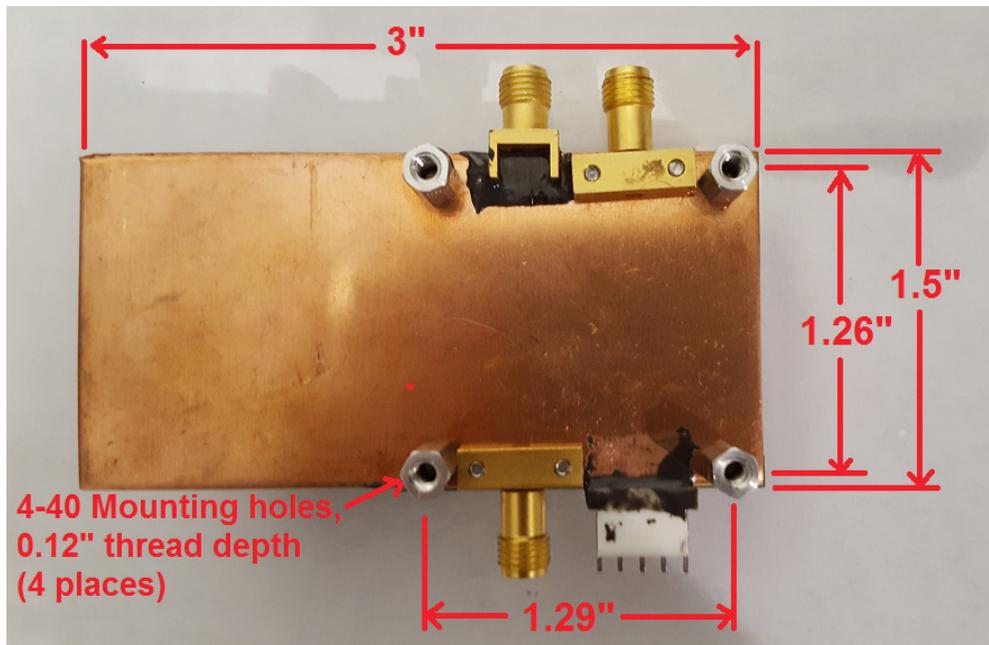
The module may be mounted using four 4-40 screws. Mounting hole pattern is shown. Do not remove spacers or drill through the copper plate.
